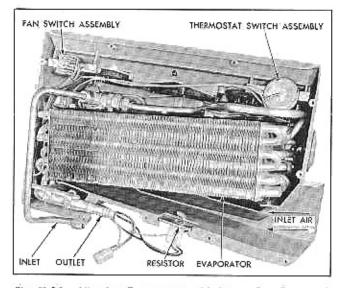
Viewing Evaporator with Lower Pan Removed
